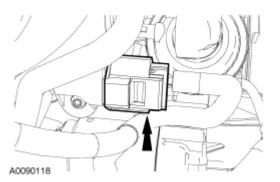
Locating Manifold Actual Pressure (MAP) Sensor Electrical Connector Courtesy of FORD MOTOR CO.
